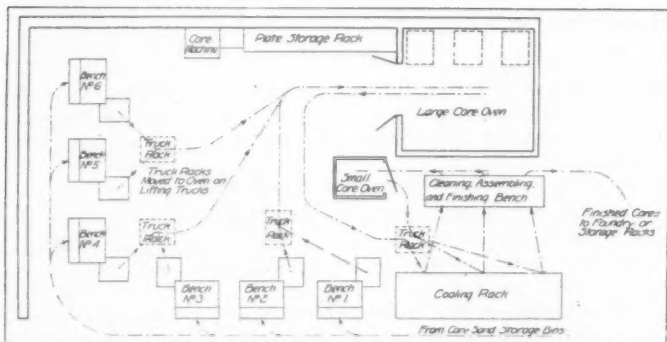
LAYOUT OF NEW FOUNDRY CORE ROOM
